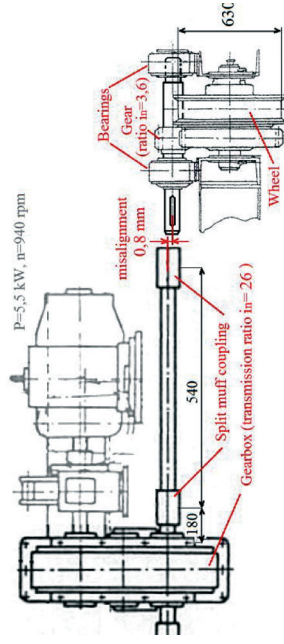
Misalignment between the gearbox shaft axis and drive shaft axis of the wheel
